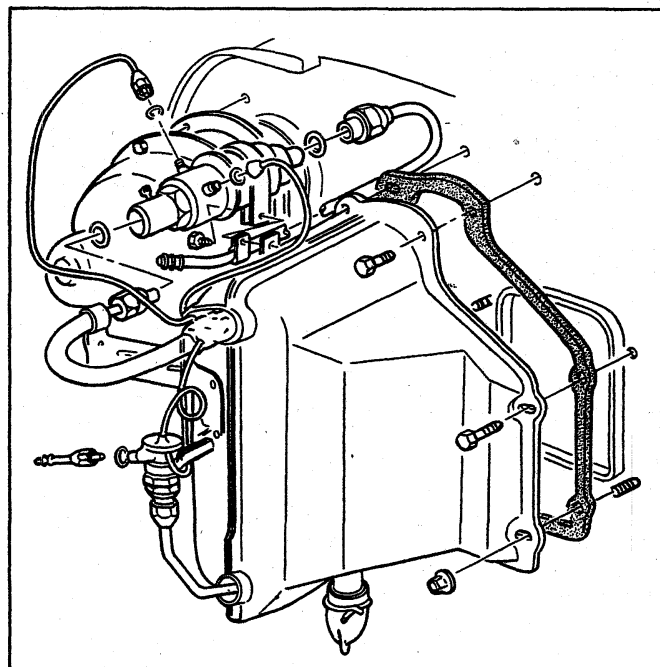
Evaporator Mounting (Chevrolet and Camaro)
